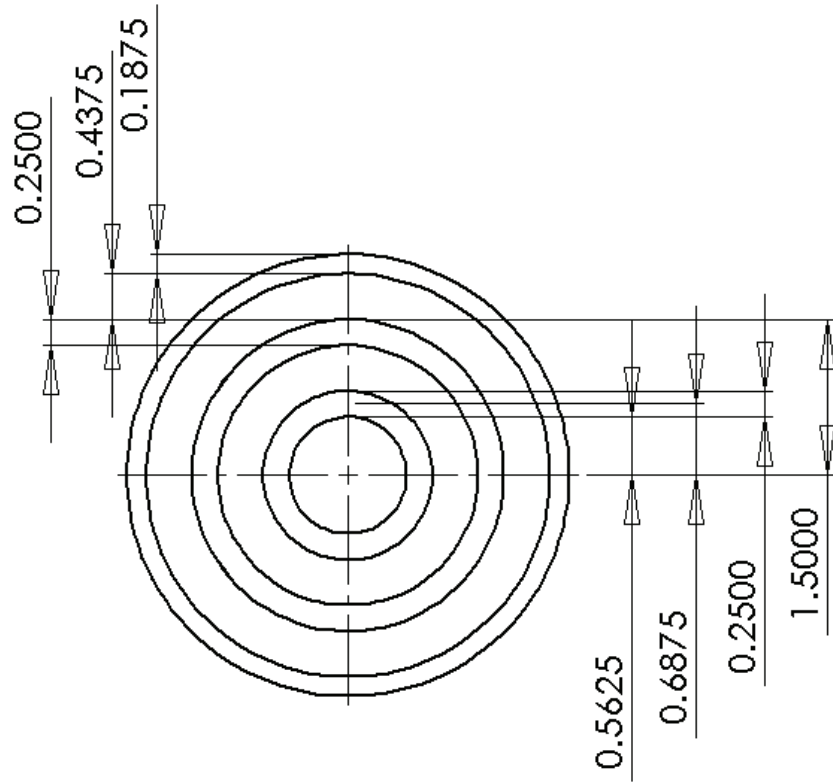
Mechanical drawing of the inside of the part *right dummy hub.sld
